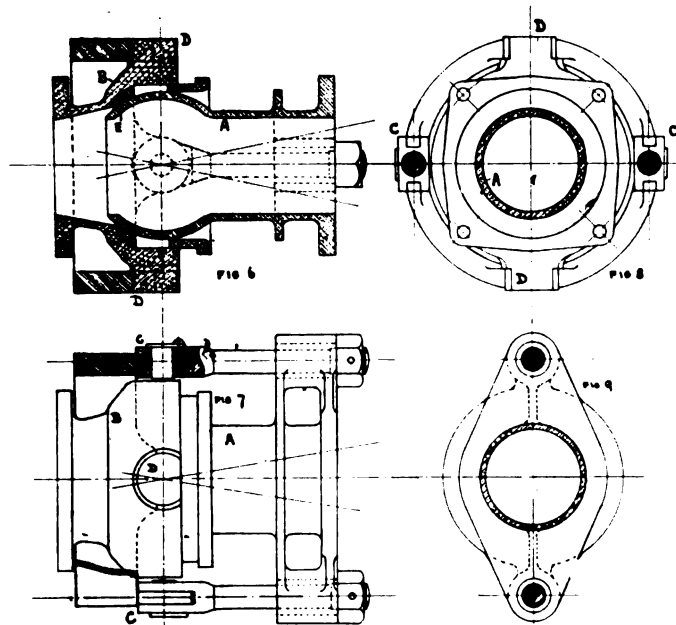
, 7, 8 and 9. Harter's Ball Joint, Universal Type. For High Pressure Pipes.
